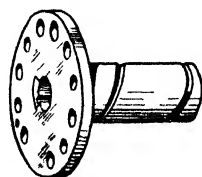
The hardened-steel bearing plate which is finished all over and ground on all important surfaces.
